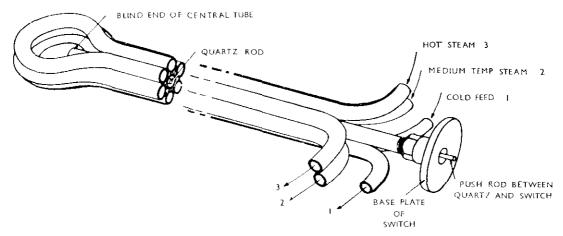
THERMOSTAT TUBE ASSEMBLY
